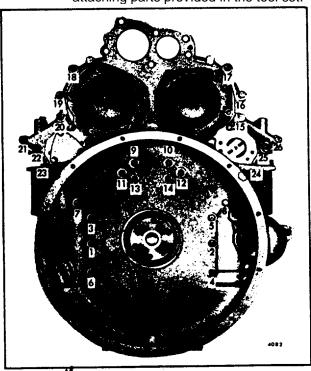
Flywheel Housing Bolt Tightening Sequence (Operation 2).6V Engine
